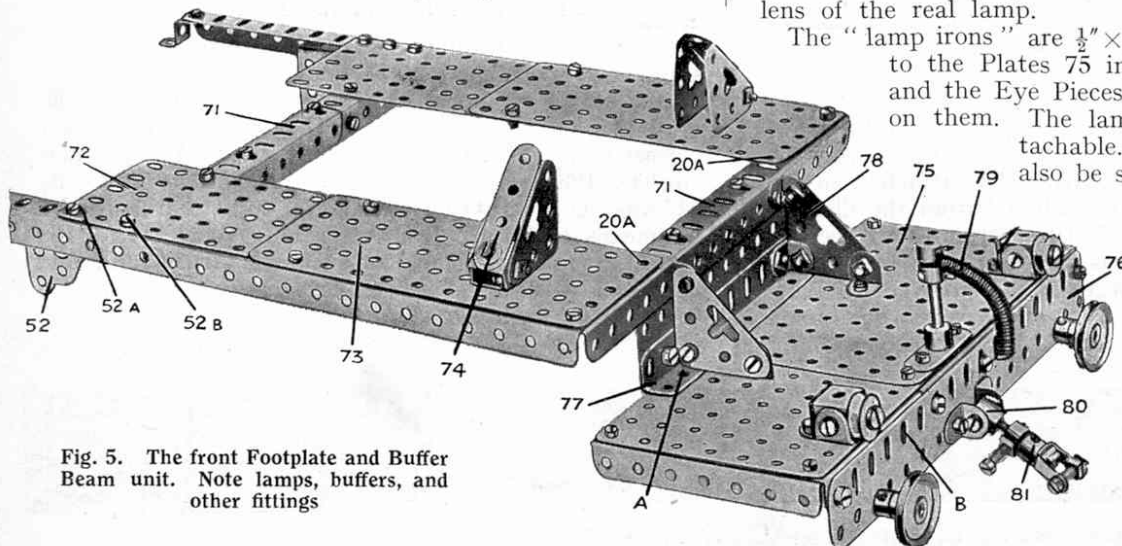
The front Footplate and Buffer Beam unit. Note lamps, buffers, and other fittings
